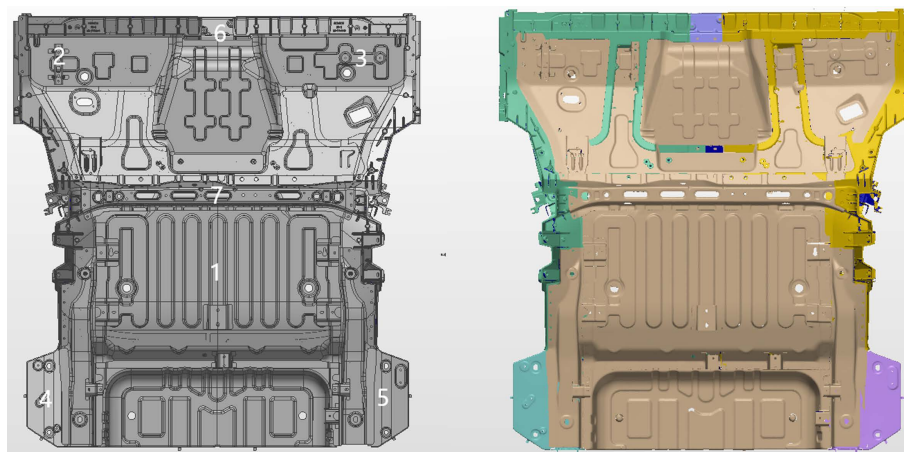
“Rear floor” assembly CAD and point cloud assembly part drawing
